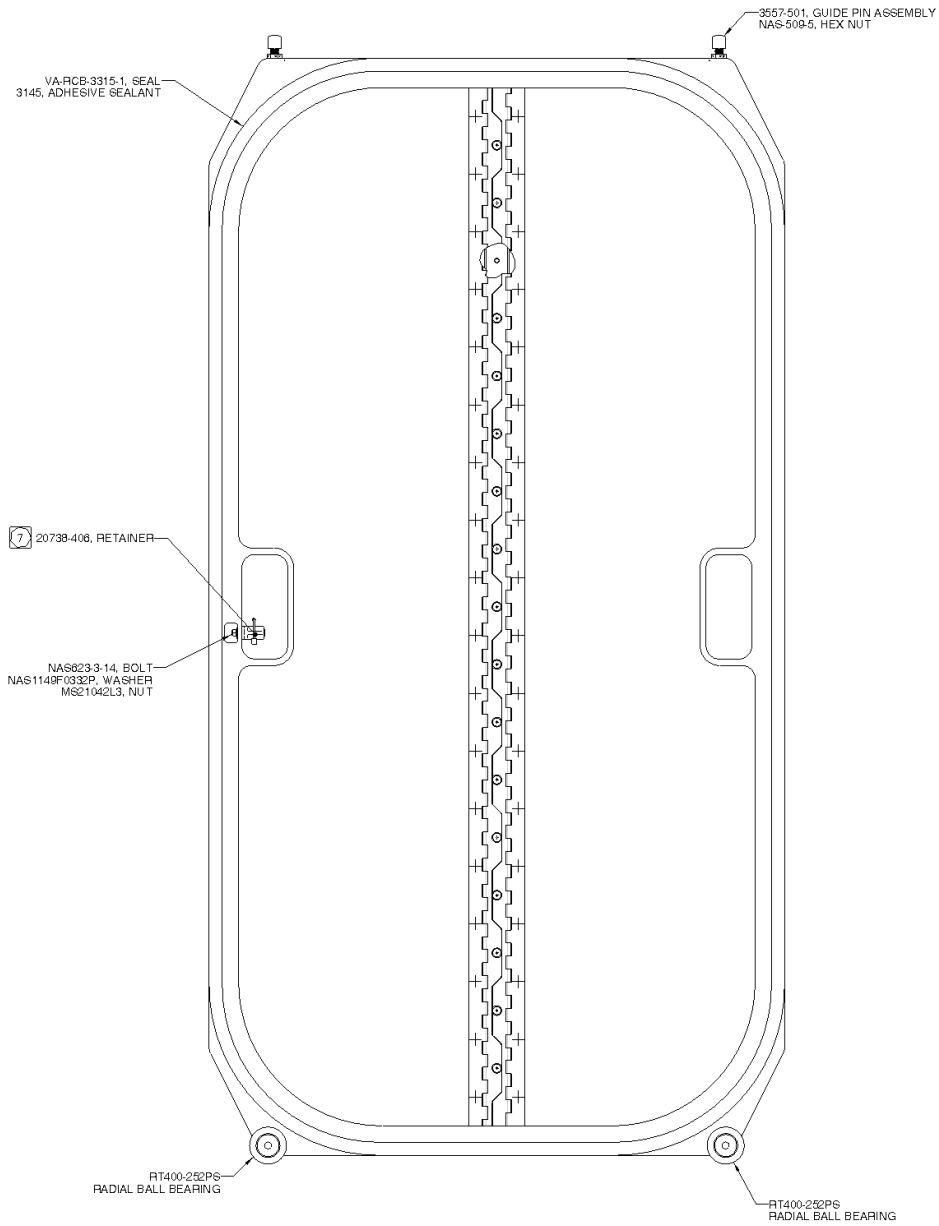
SLIDING DOOR ASSEMBLY REMOVED FROM AIRCRAFT
